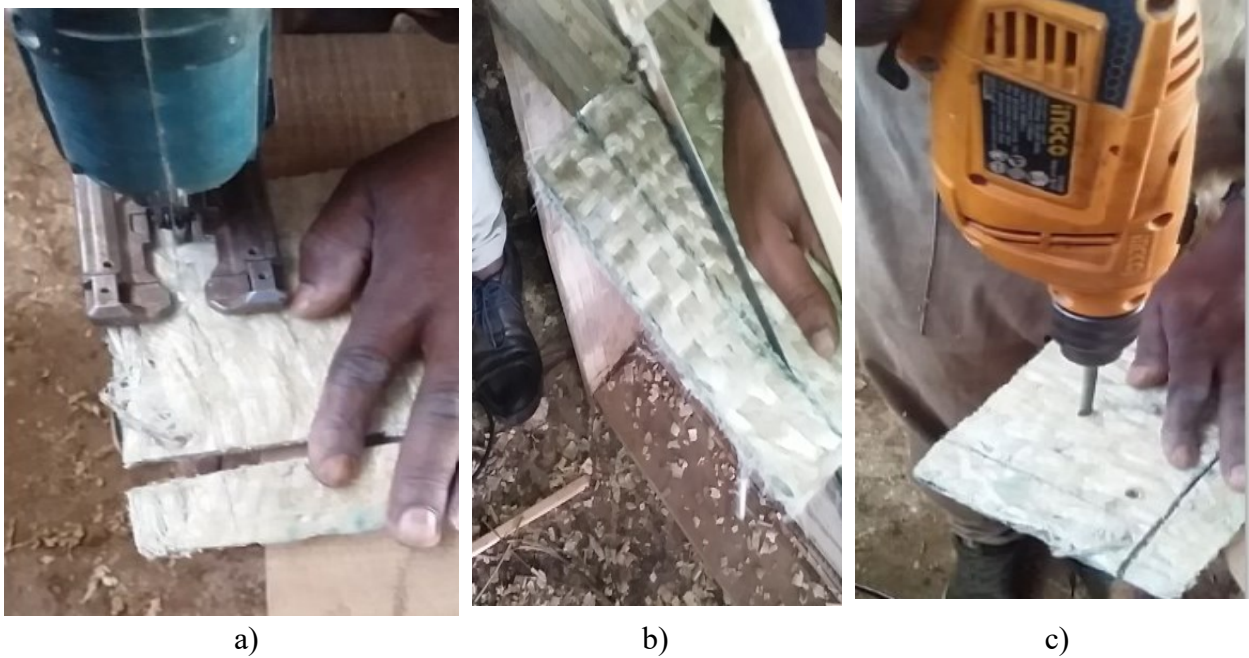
23 HFCM composite machining a) Electric motor cutting b)Hand hacksaw and c) Drilling motor driven
